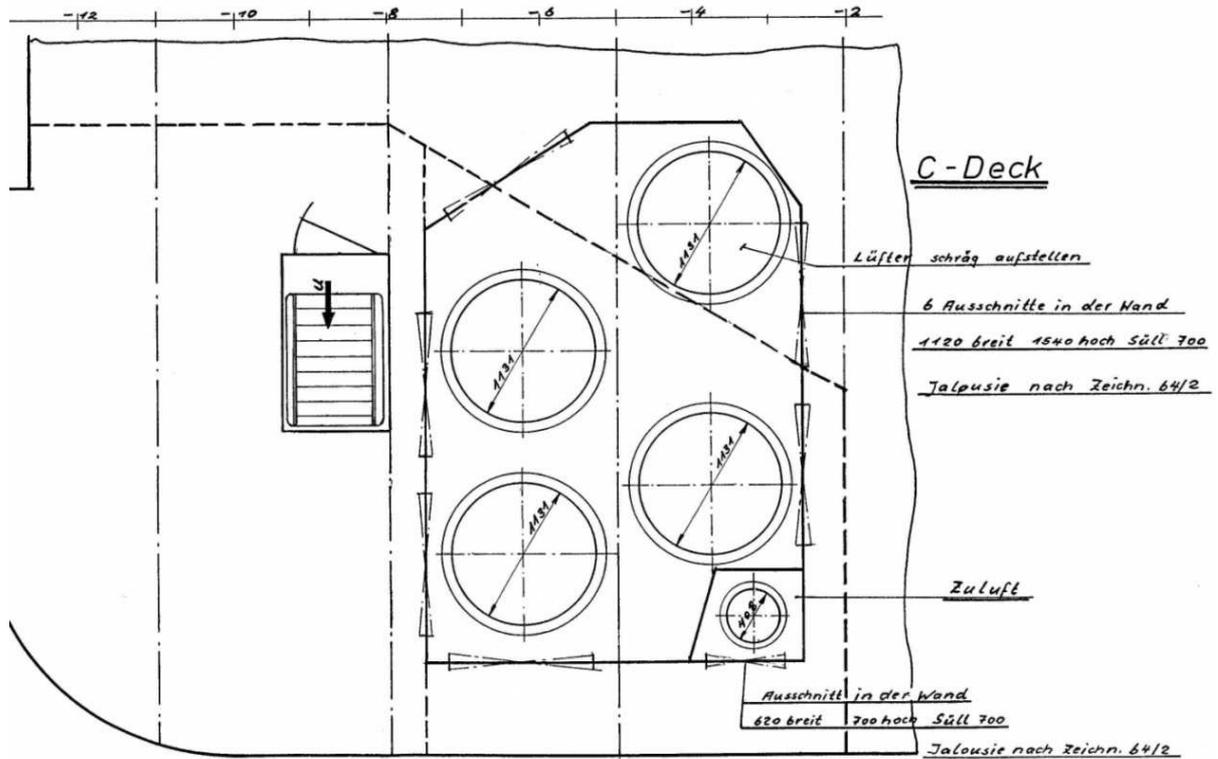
Aft Wing House, starboard side, top view, Drawing S590 – 24/2
